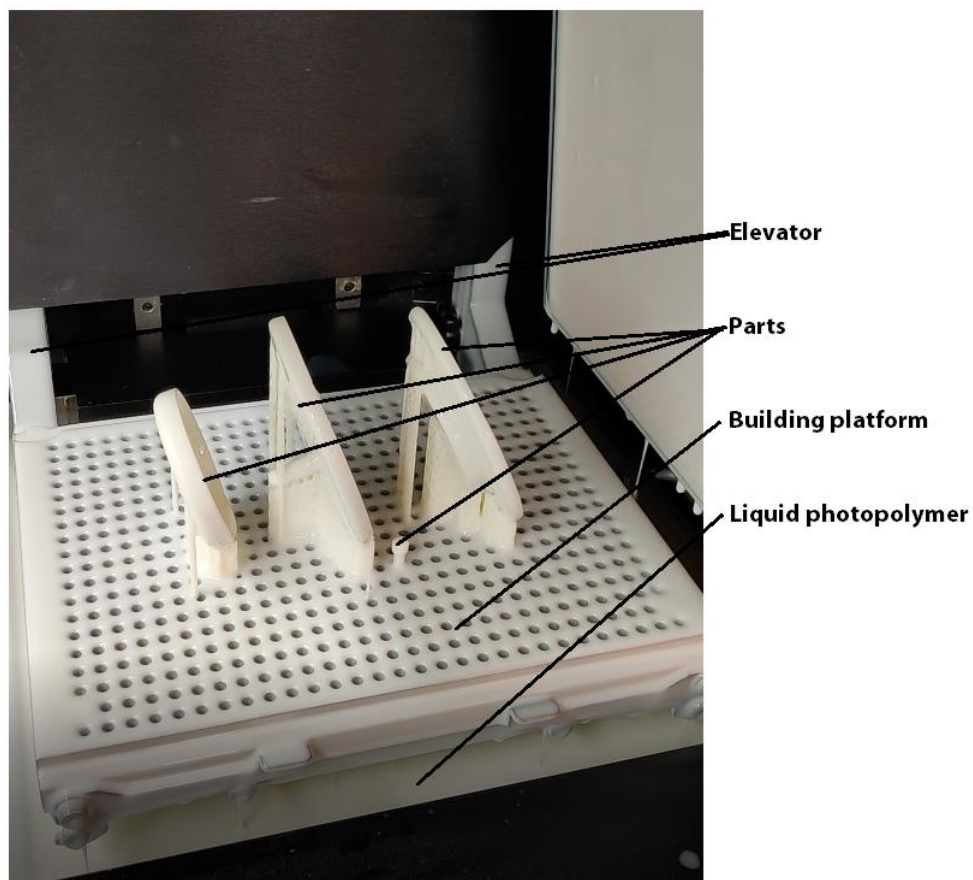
DLP (similar to SLA) 3D printing machine, with fresh printed parts. Source: CETEM.
